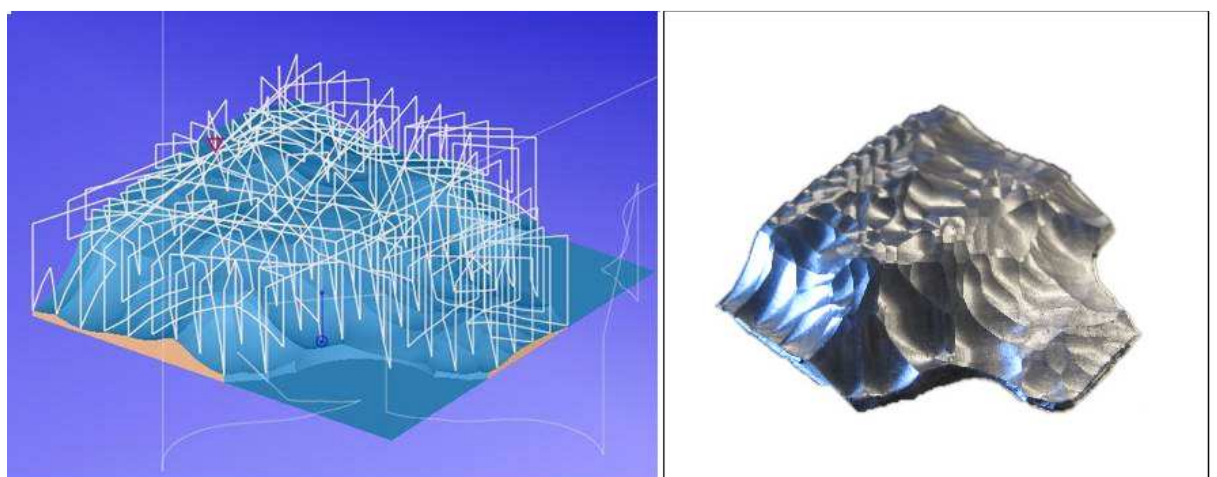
Simulated and machined free form surface and optimized tool path in 3D.
